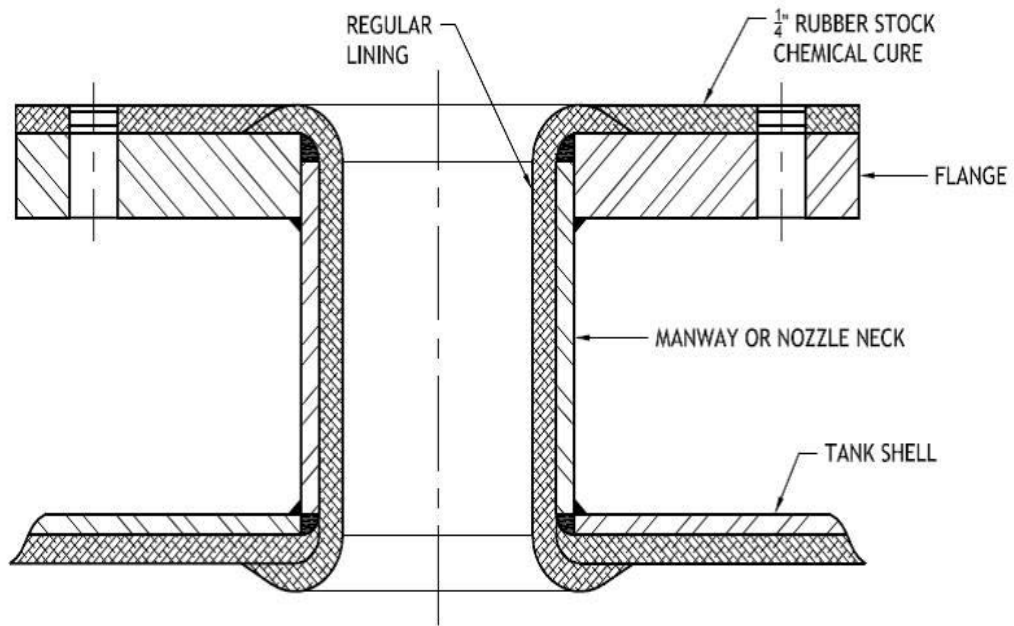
Internal steam cure vessel flange detail for outlets
